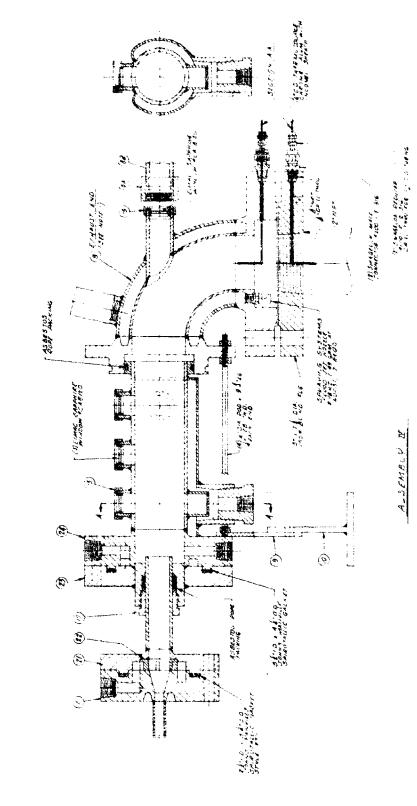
ASSEMBLY OF REDESIGNED COMBUSTION CHAMBER
